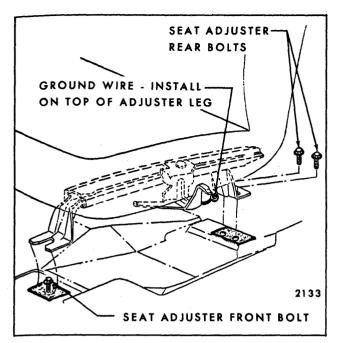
Seat Adjuster Floor Pan Attachment –
